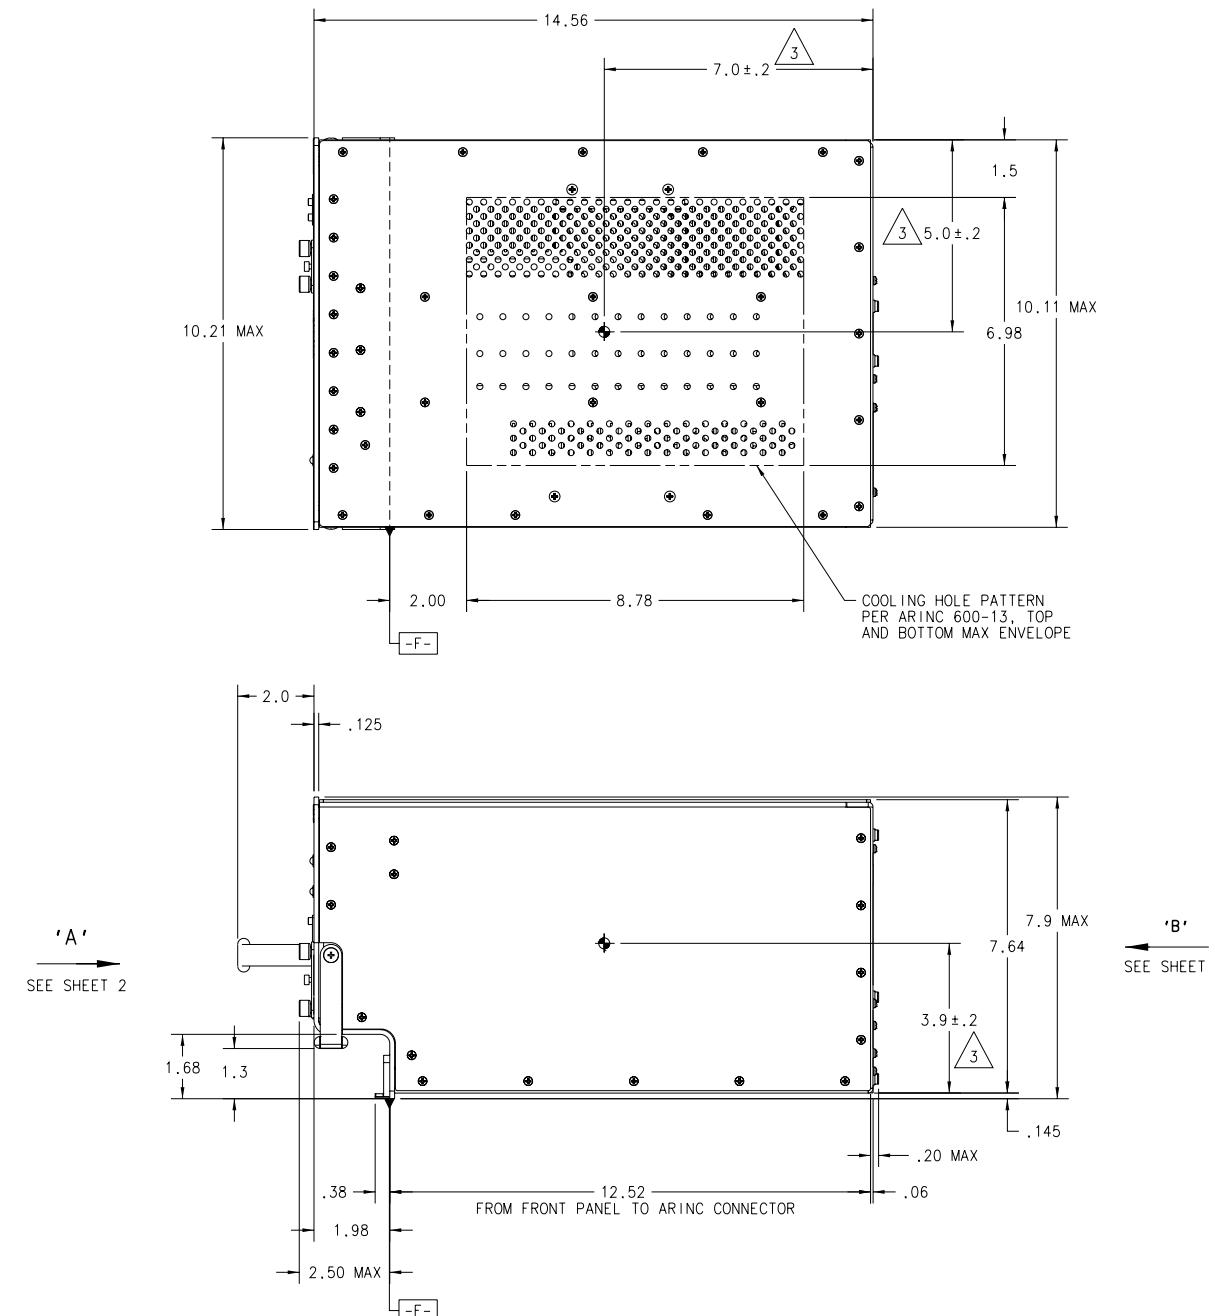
(Sheet 1). HD-710 Terminal Outline and Installation Drawing (1252-E-3600, Rev A)
